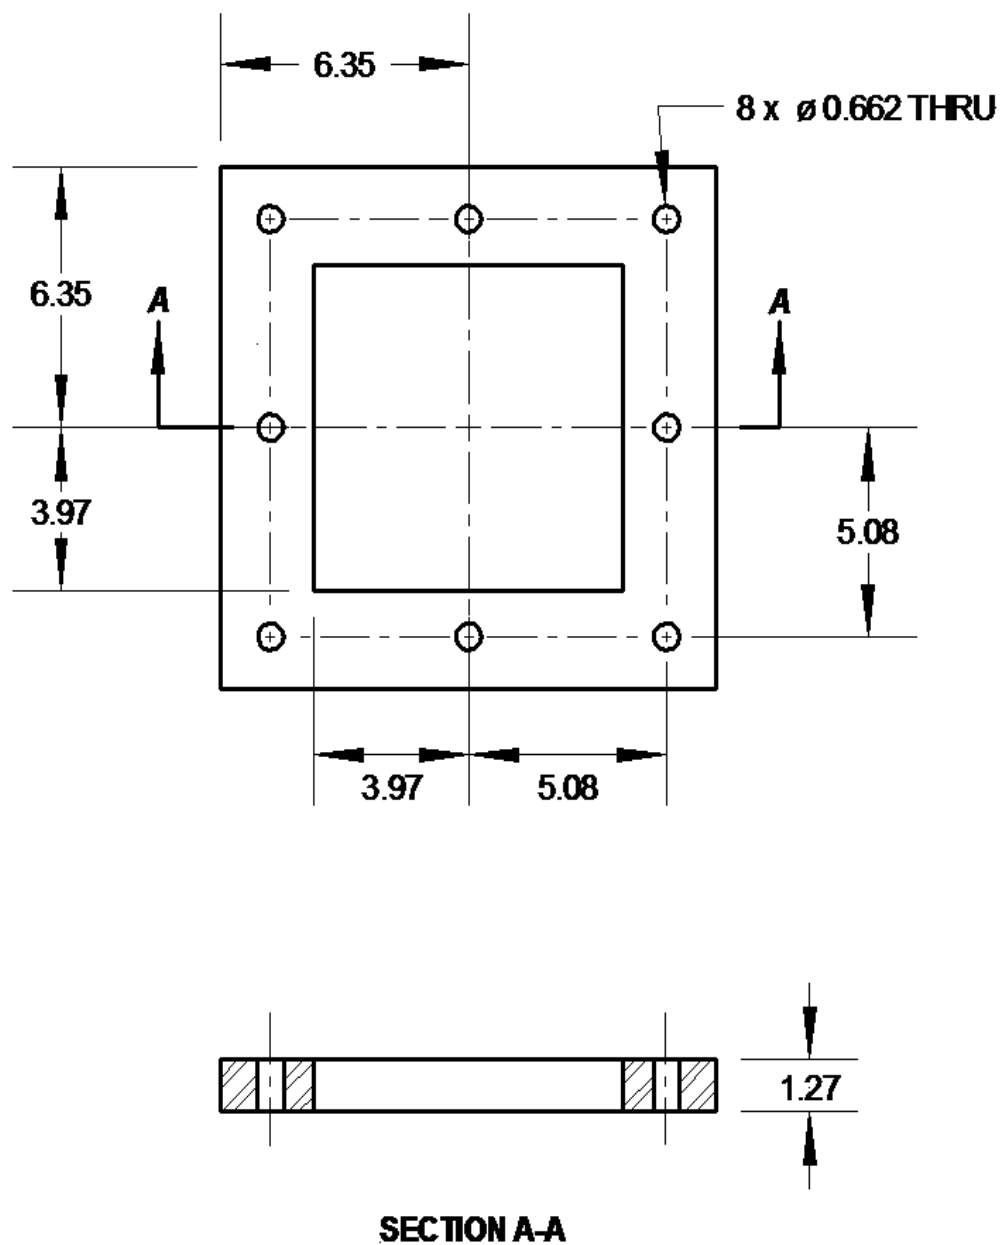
Spacer plate in the Dynatup plate specimen fixture assembly. The plate was machined from 304 stainless steel plate stock 1.27-cm thick. All dimensions are in *cm* unless otherwise specified.
